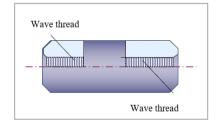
Schematic Diagram of Drill Pipe Connecting Sleeve
